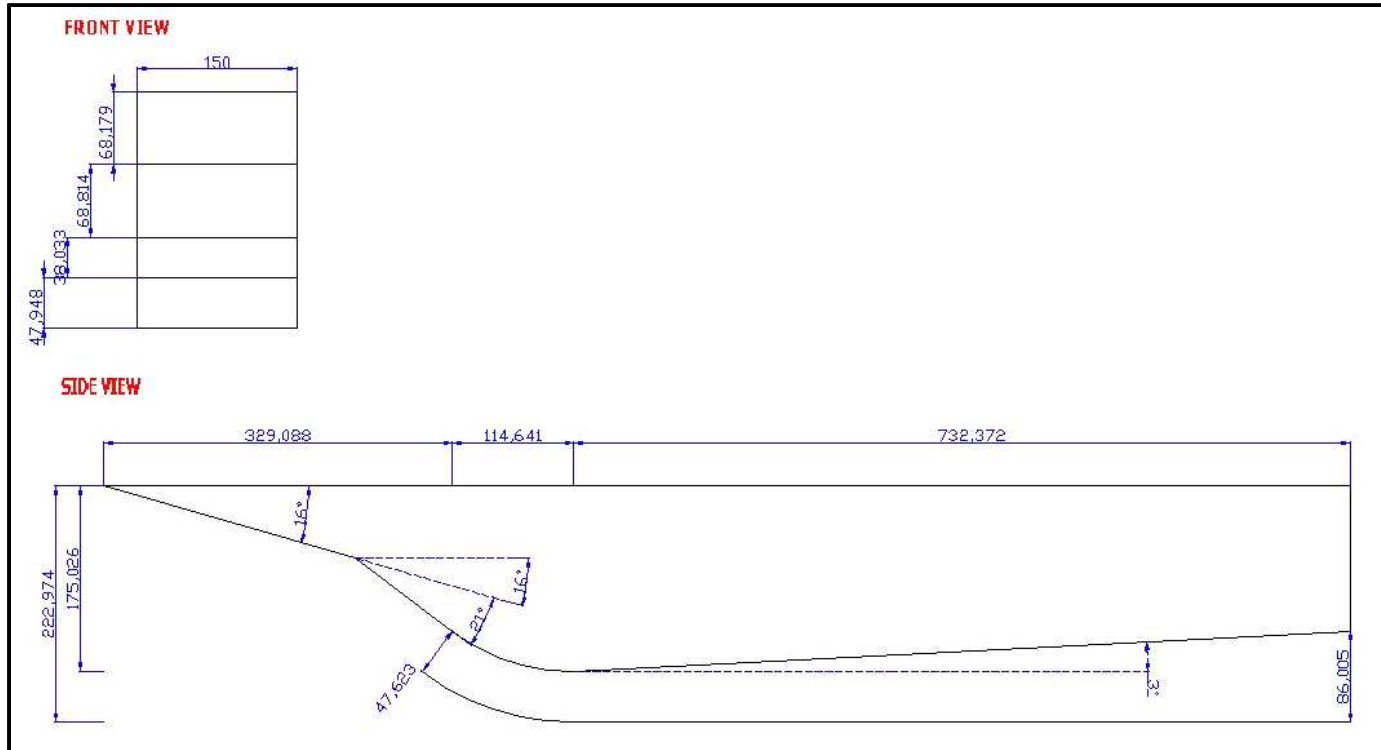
Front and side view drawings of the designed inlet (dimensions in mm)
